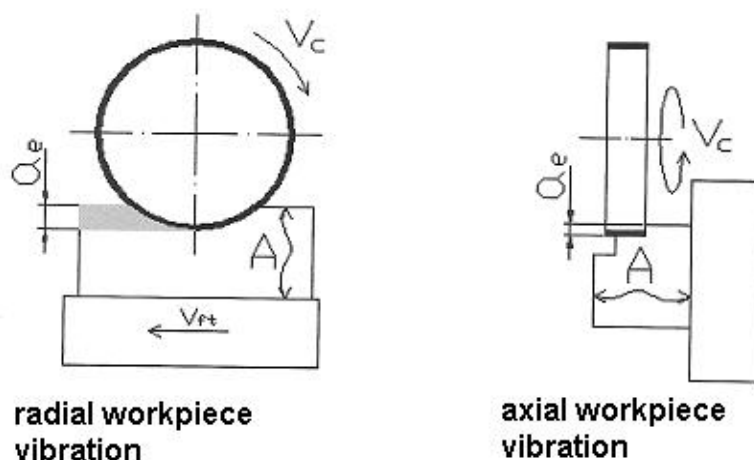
Ultrasonic grinding by the workpiece vibration
